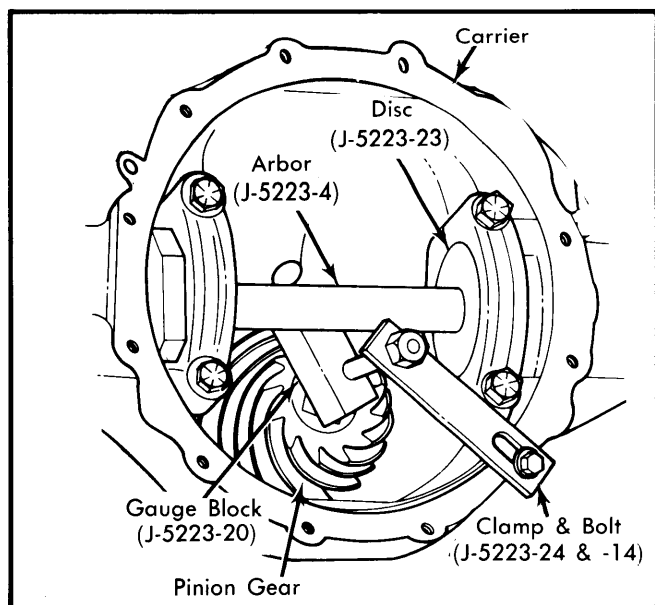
Measuring Pinion Depth. Make Measurement With Gauge Block Inserted Between Pinion Gear and Arbor.
